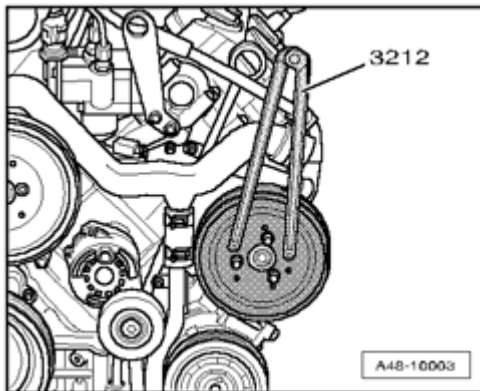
Loosening Bolts Use Spanner Wrench 3212 To Counter-Hold
